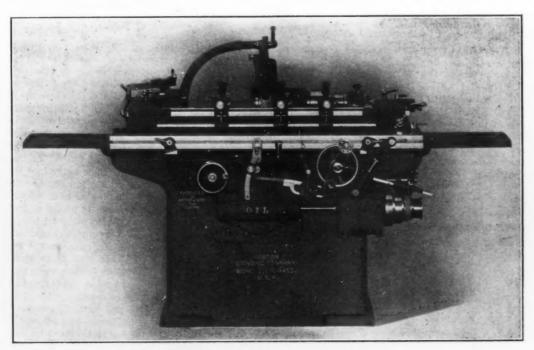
The 6 x 32 In. Cylindrical Grinder Built by the Norton Grinding Company, Worcester, Mass.
